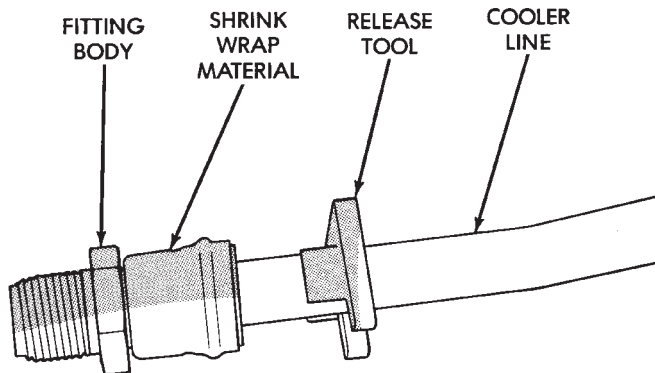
Type II Quick Disconnect Fitting And Release Tool
